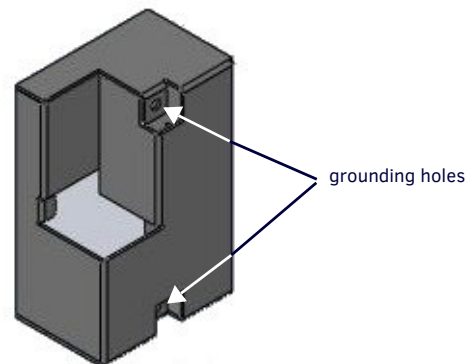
RGB WALLPLATE (REAR-VIEW) WITH GROUNDING CABLE LOCATIONS
